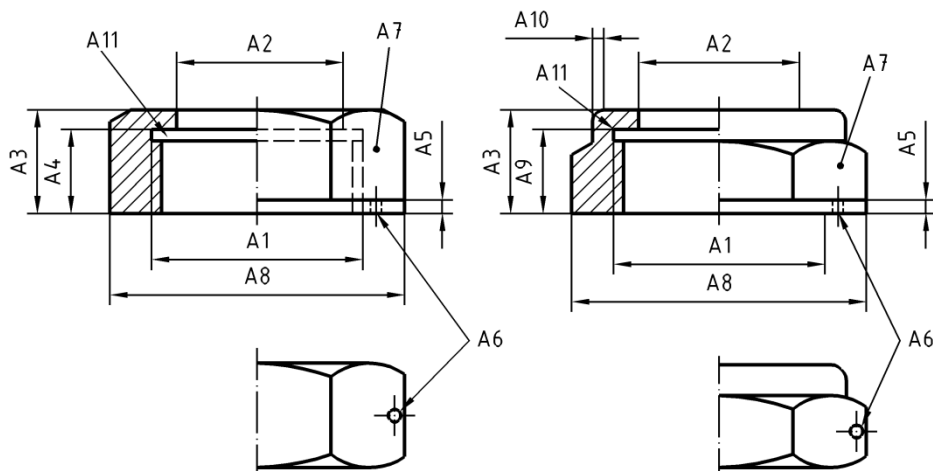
Type H.13 — External threaded G 2 1/4 flat seal connection
